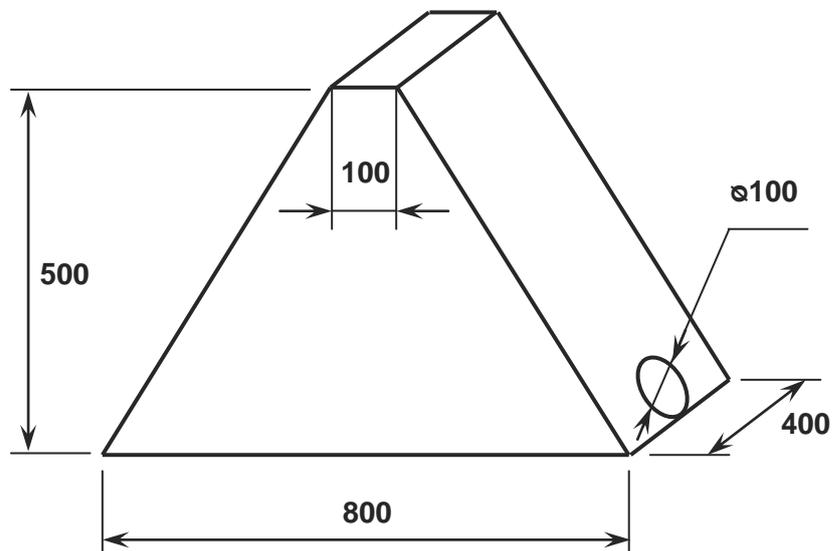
Thin-Wall Trapezoidal Spillway Dimensions
